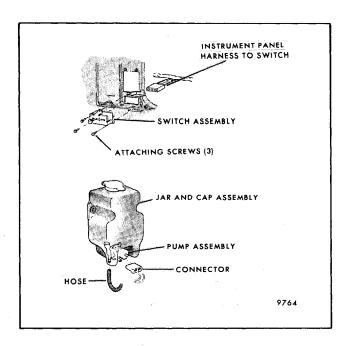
Windshield Wiper Switch Installation - Pontiac F Styles
